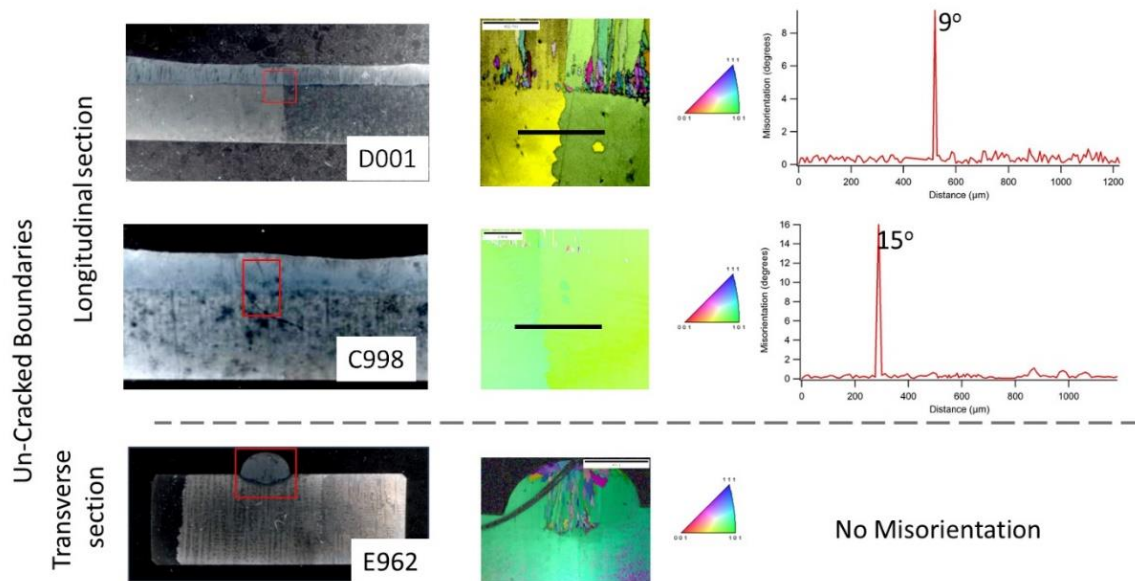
EBSD images of un-cracked DS CM247LC welds
